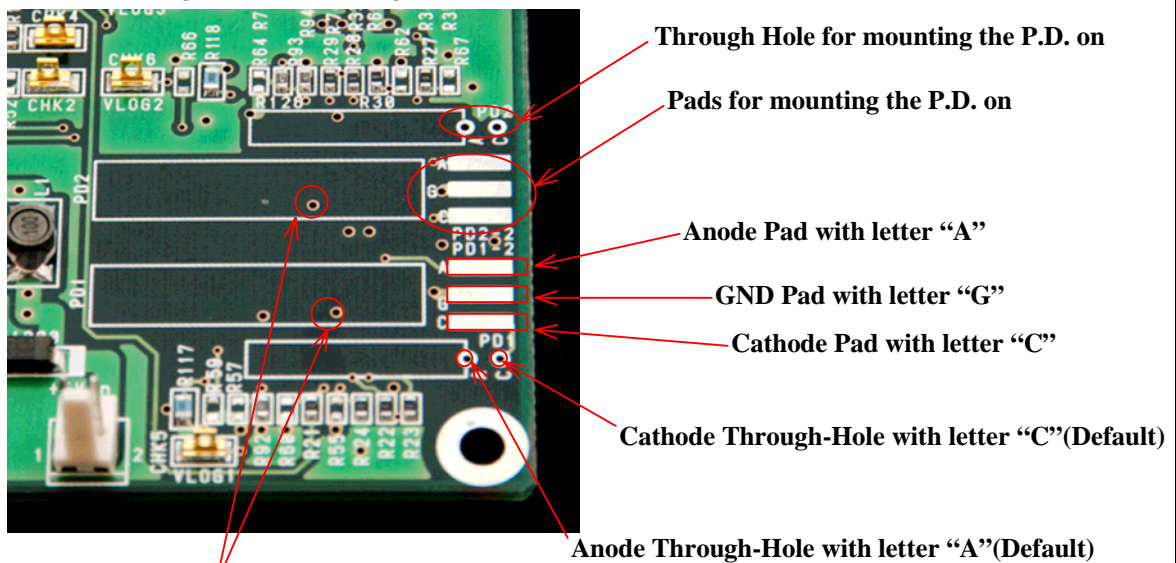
Mounting View of Photo Diode(PIPD-1550-05-0-31-1-2)
